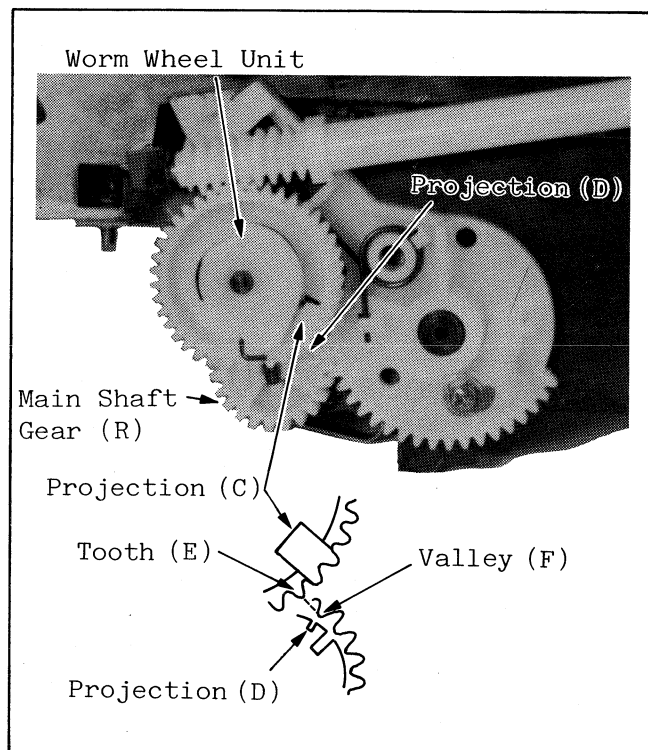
Adjustment of Cassette Up Gears-(4)
